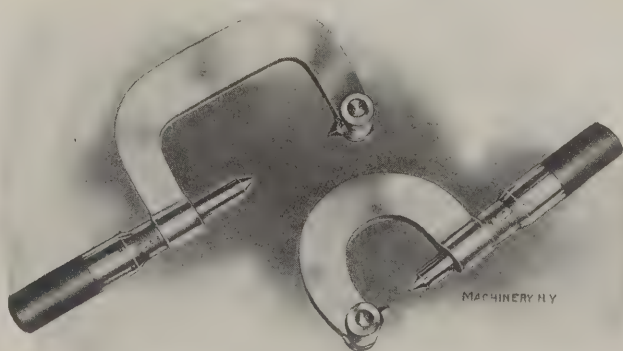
Screw-thread Caliper made in Hand Micrometer Style.
